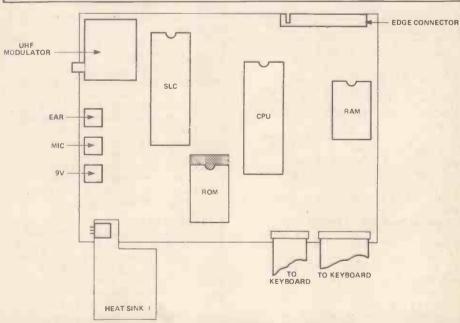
The component layout inside the ZX81. The 24-pin ROM is mounted in a 28-pin socket; the hatched area indicates the unused pins.
